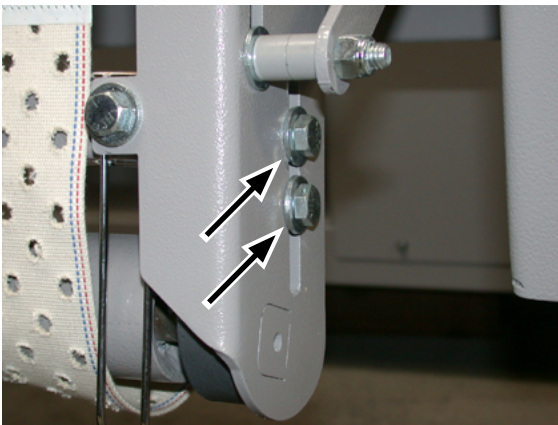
Roll bearing mounting bolts on the discharge and rear bypass conveyors.
